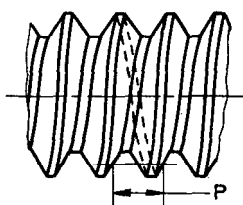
SINGLE-START THREAD WITH LEFT-HAND EXTERNAL THREAD
